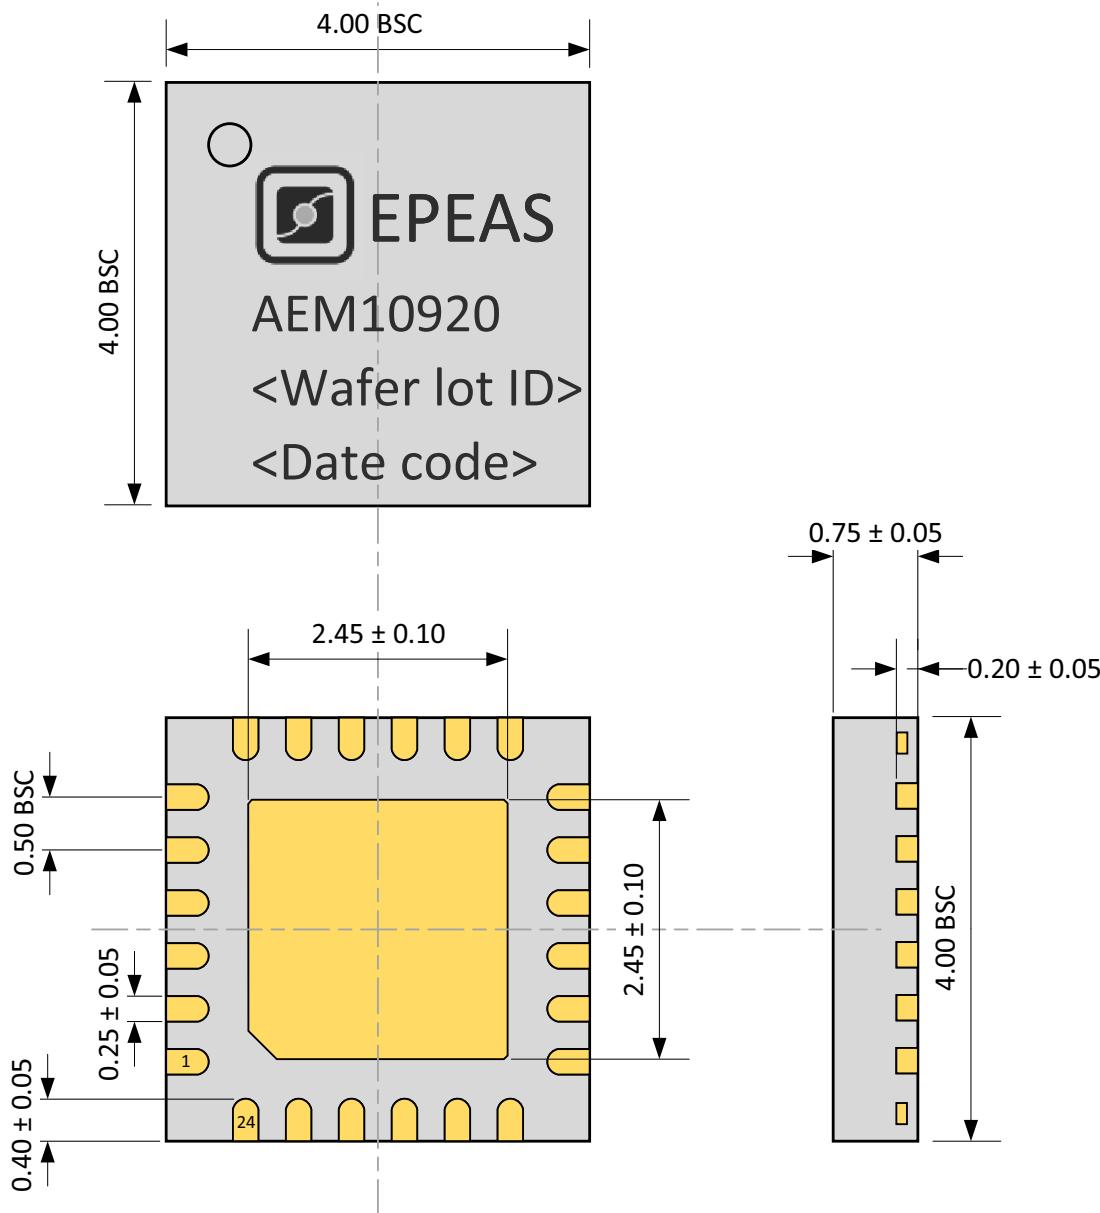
QFN 24-pin 4x4mm drawing (all dimensions in mm)
